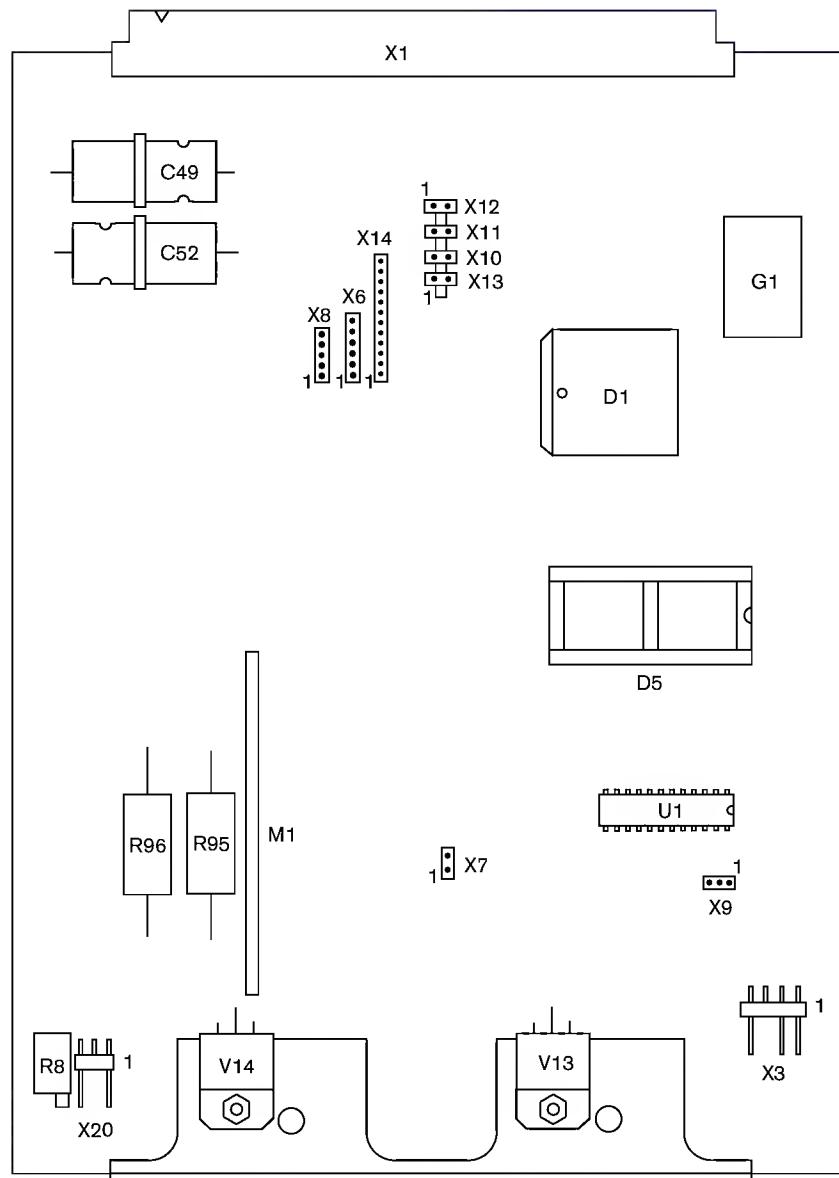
Component mounting diagram of the HPSV Controller PCB
